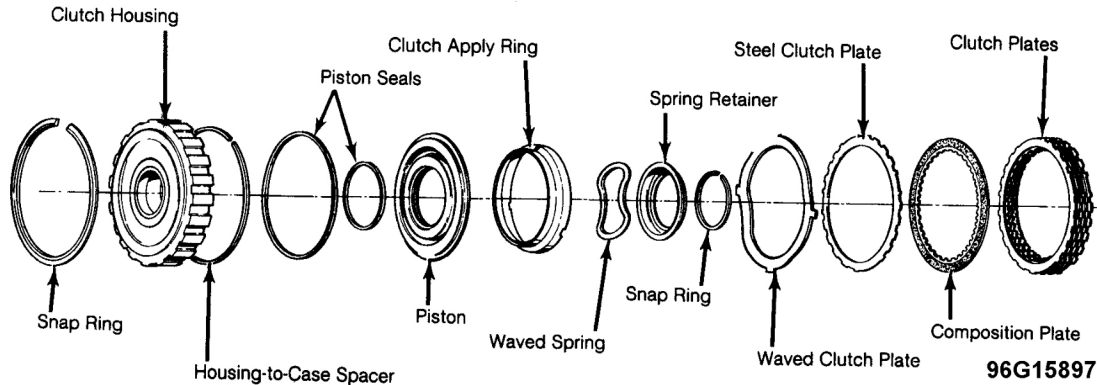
Exploded View of Low-Reverse Clutch Assembly
